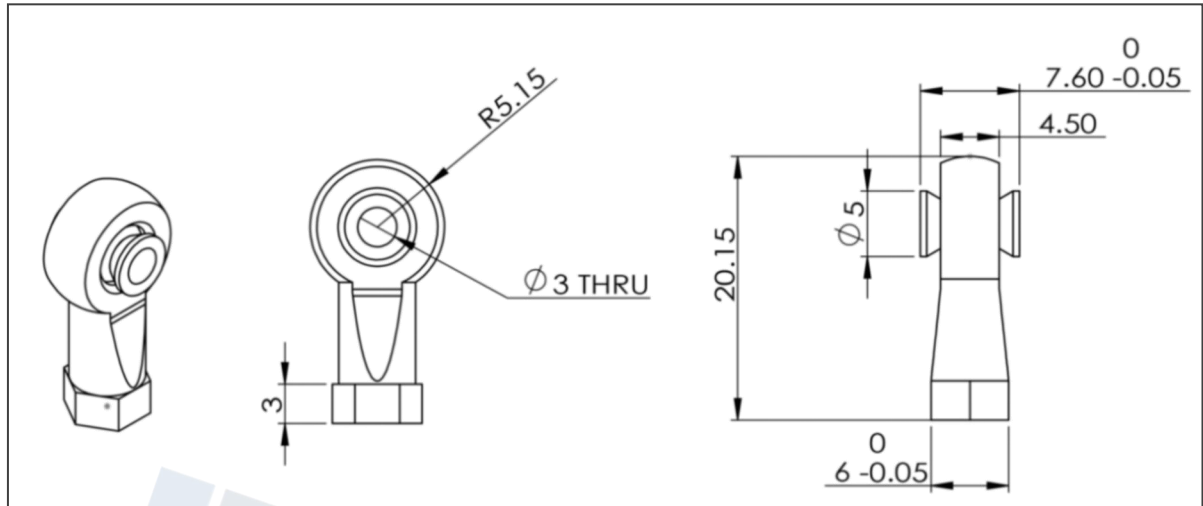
Dimensions of AMI-LA-BR-P30 Ball Joint
